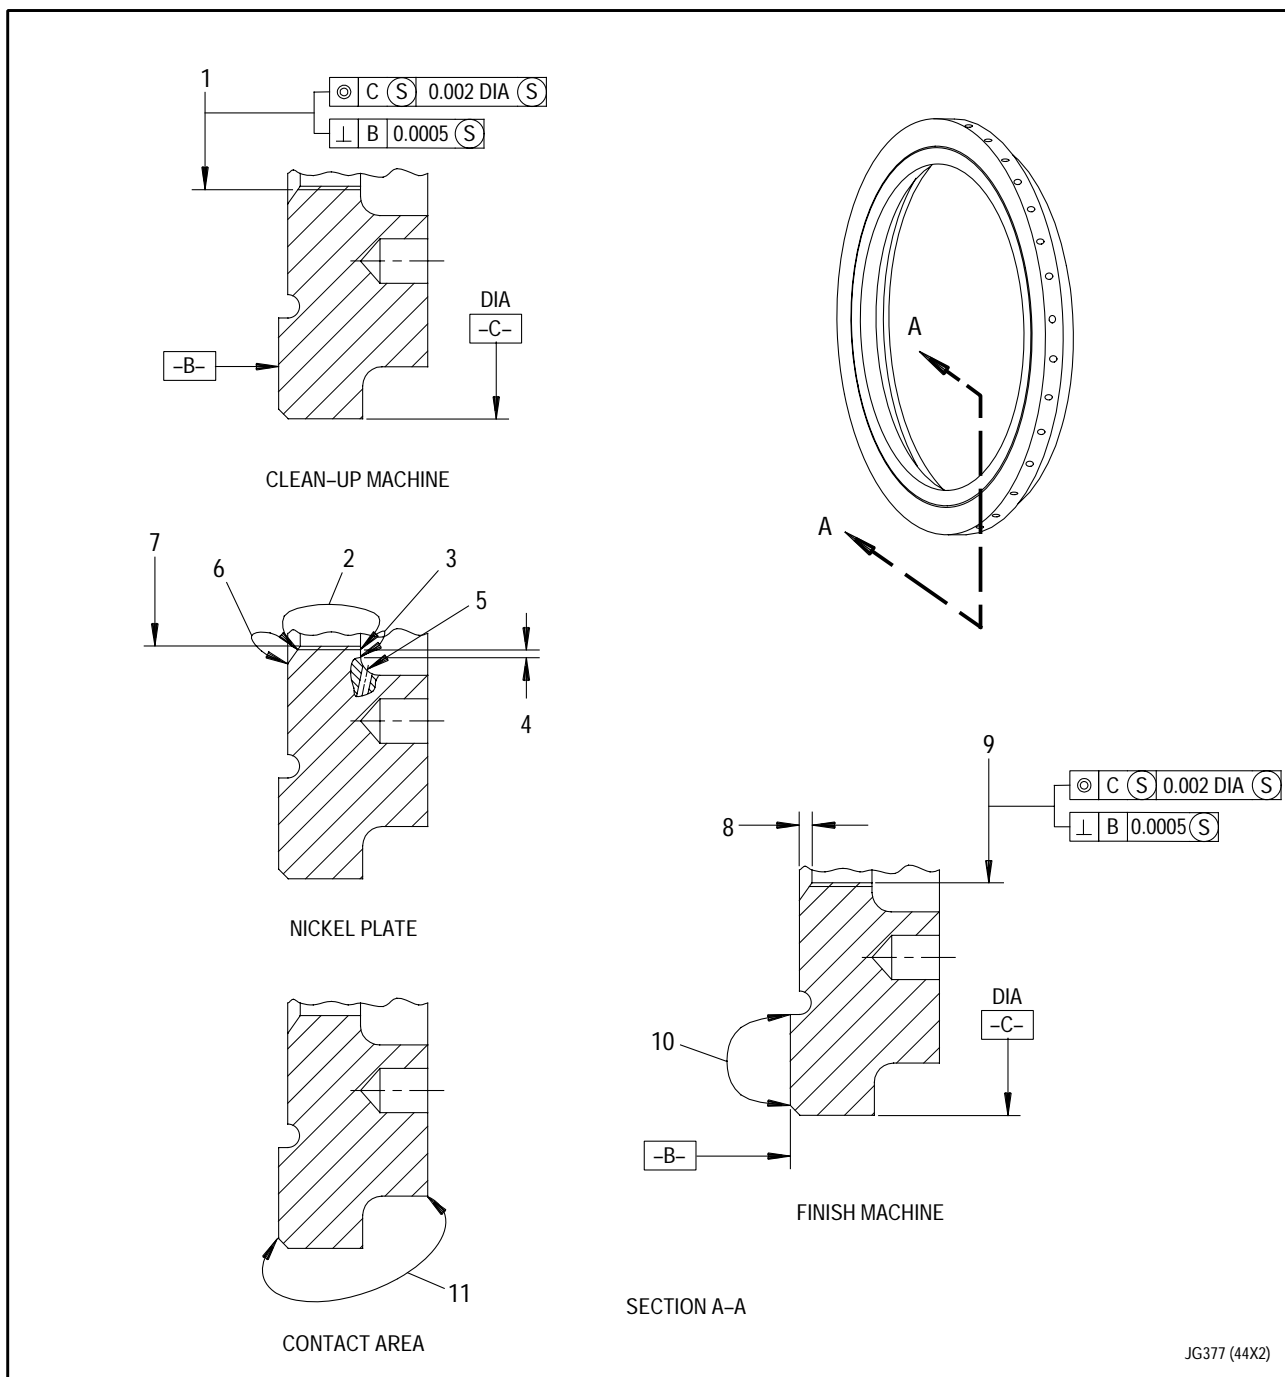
No. 2 Bearing Front Seal Seat - Nickel Plate Repair of Inside Diameter
